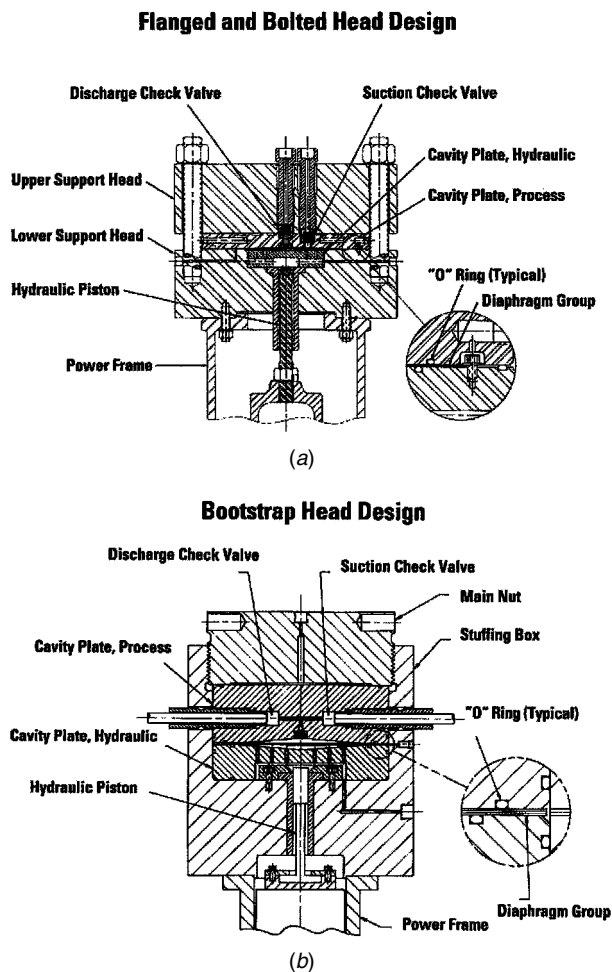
Diaphragm compressor head designs. (a) Represents the simplest and most commonly used design; this is limited to pressures of 5000 psi (345 bar) and below. (b) Provides a positive seal with a simple low-torque closure. This design is used when the combination of pressure and diameter make it the most efficient closure. (*Pressure Products Industries, Inc., Warminster, Pa.*)
